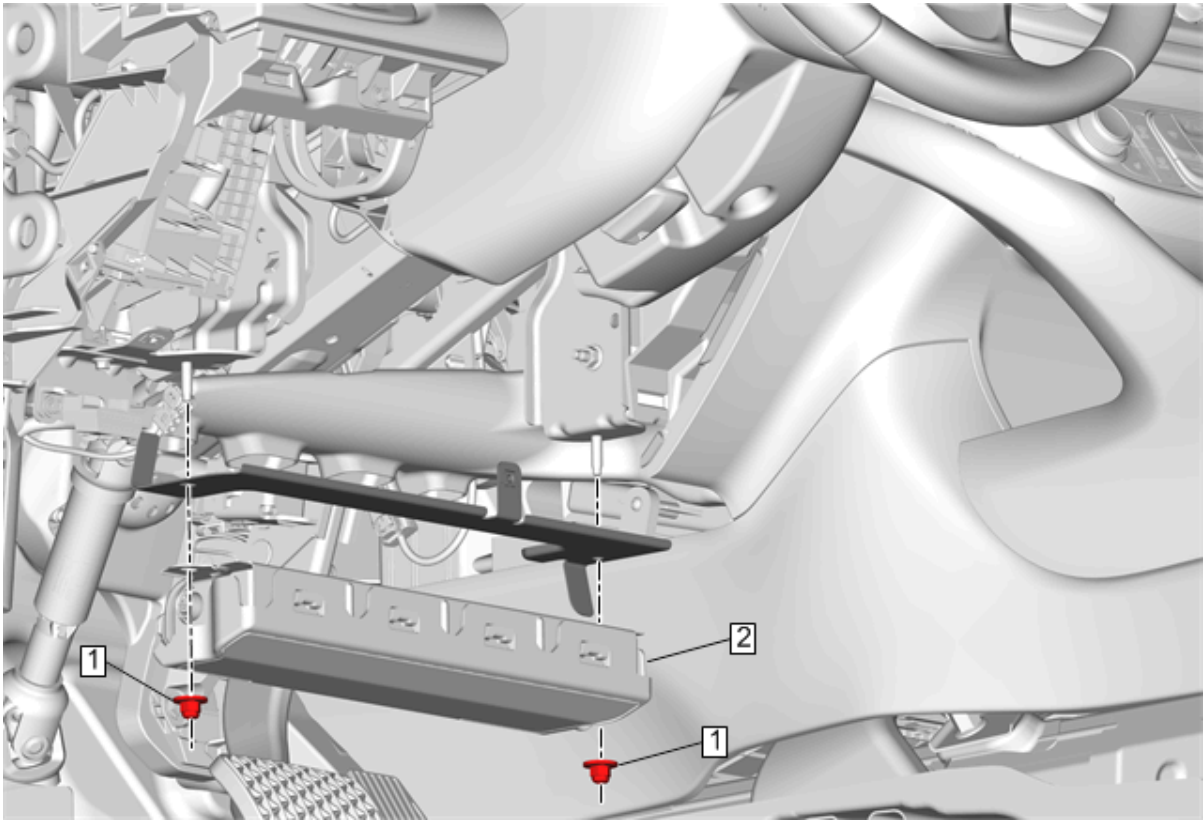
Instrument Panel Lower Airbag - Driver Side
